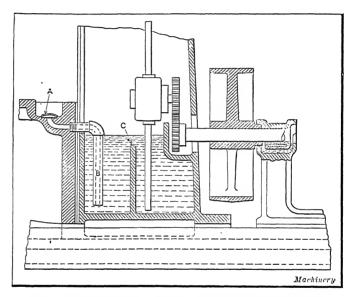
Sectional View of Frame of Drilling Machine showing Arrangement of Coolant Reservoir
